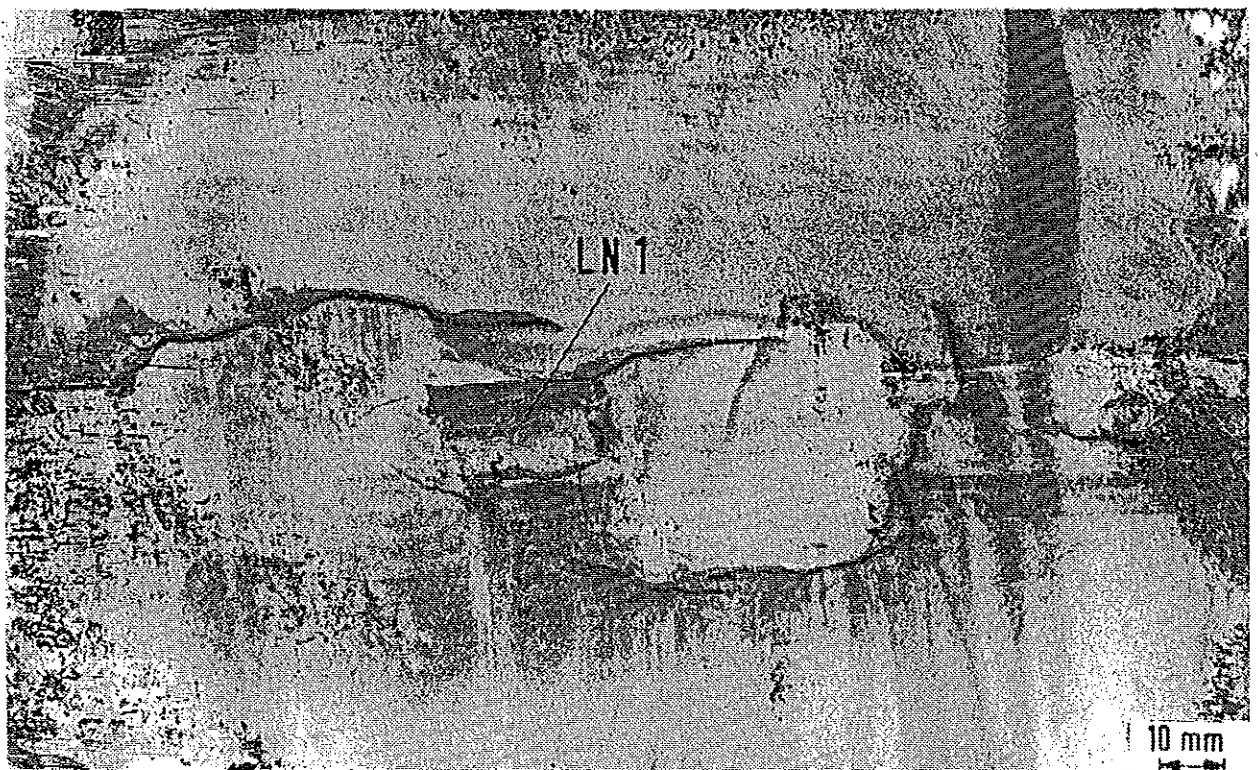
Fracture appearance in the root of longitudinal weld LN 1,
